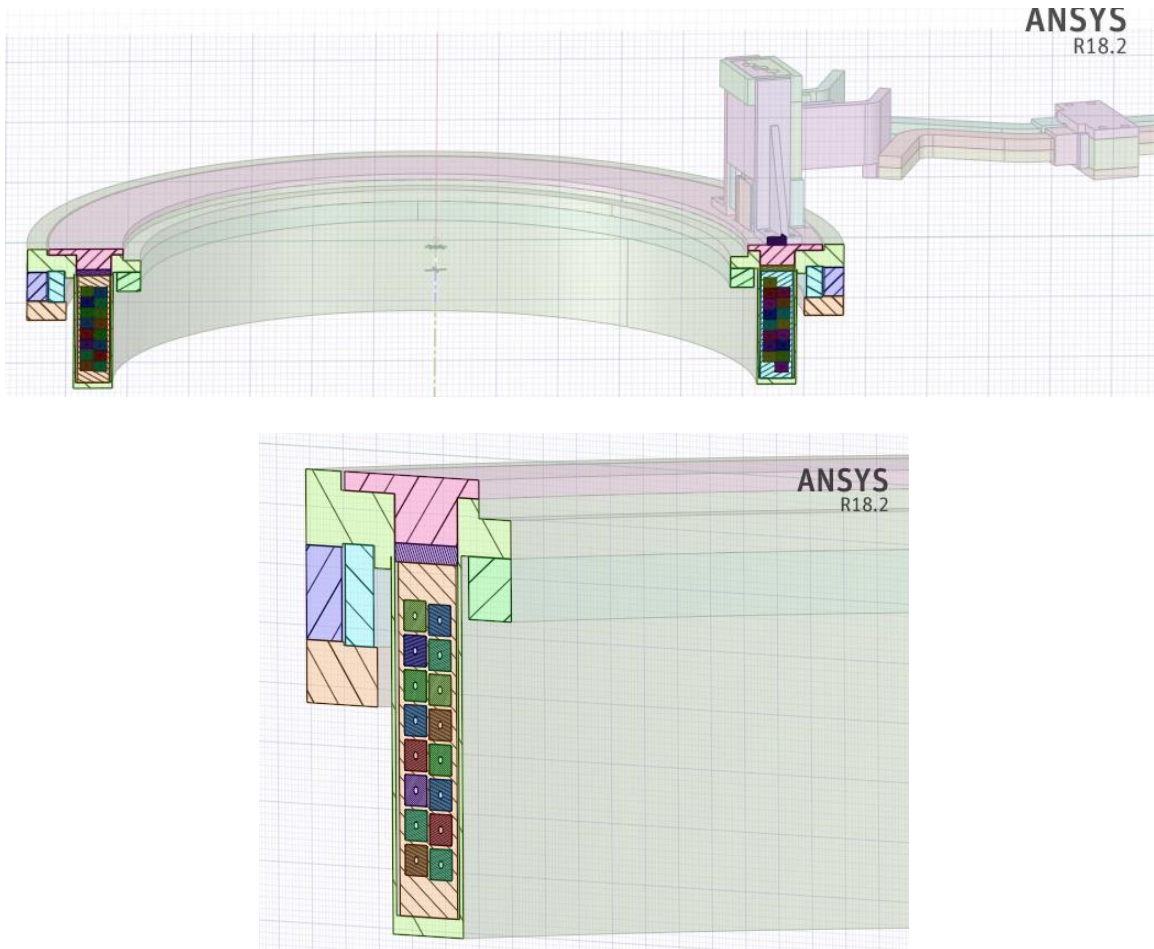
Solid model of the PF1C upper winding coil package, coil support, lead support, flags, inner bus bar with support.
